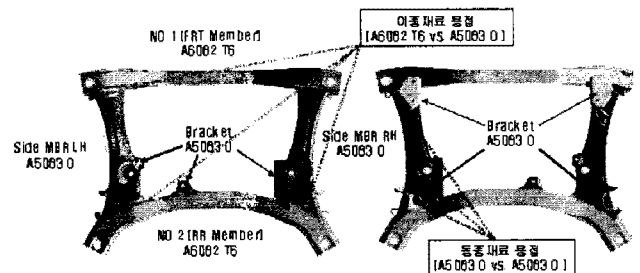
Aluminum alloy of Subframe and welding condition
